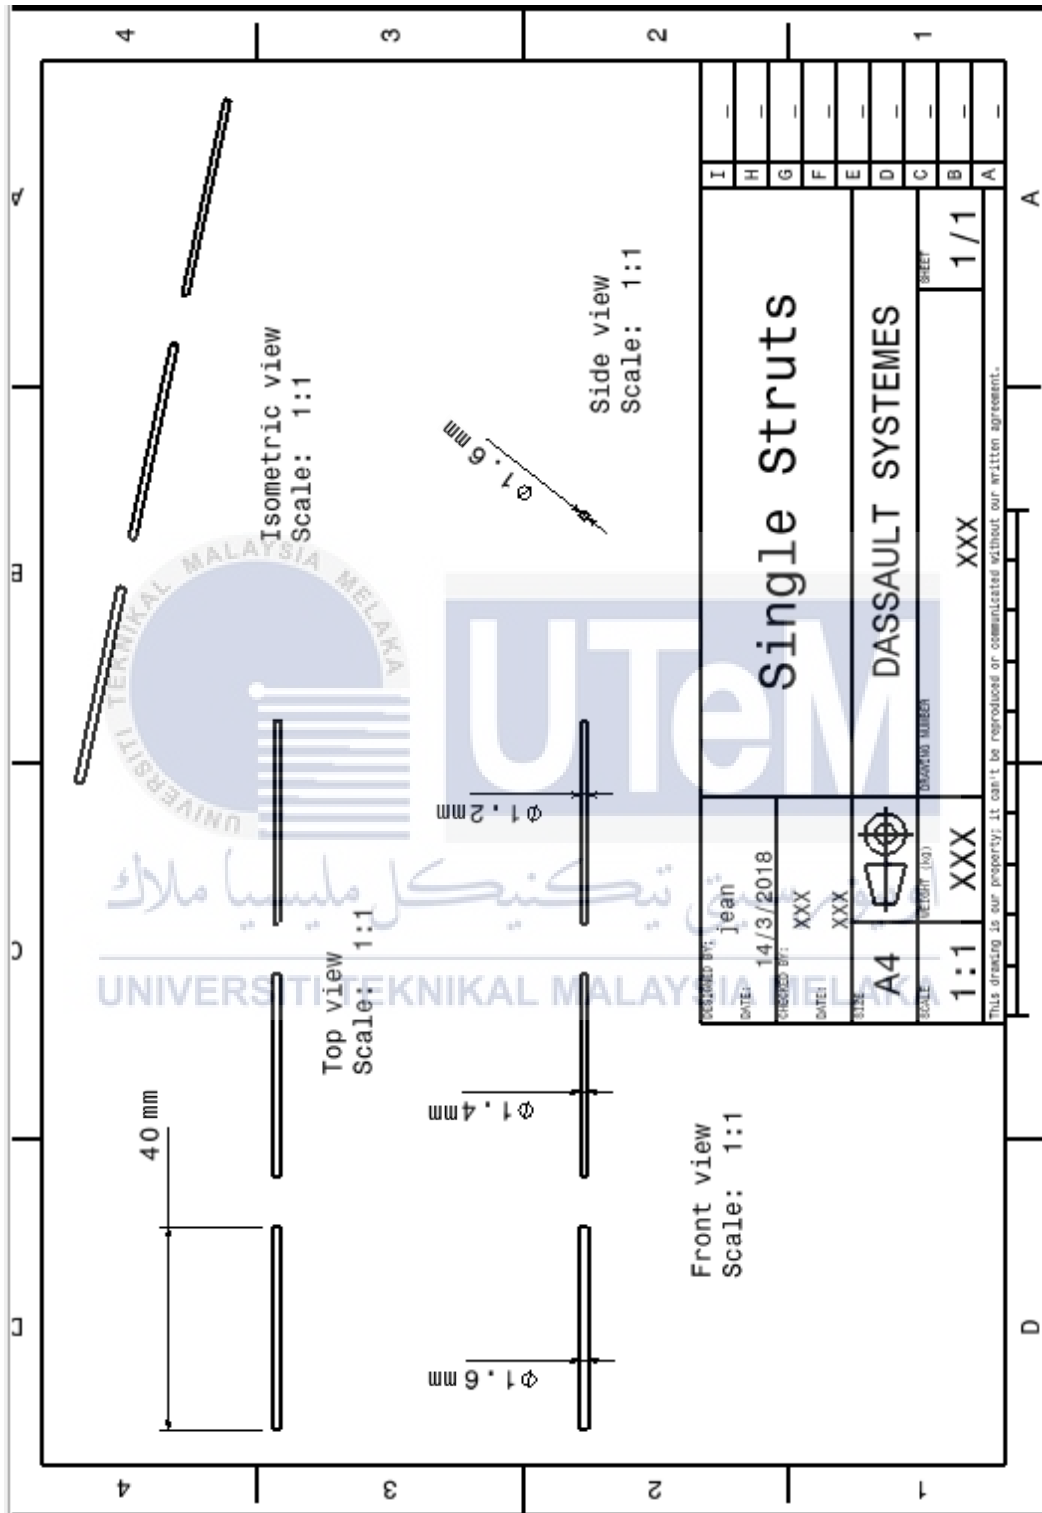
The dimension drawing of single struts with 90° using CATIA.
